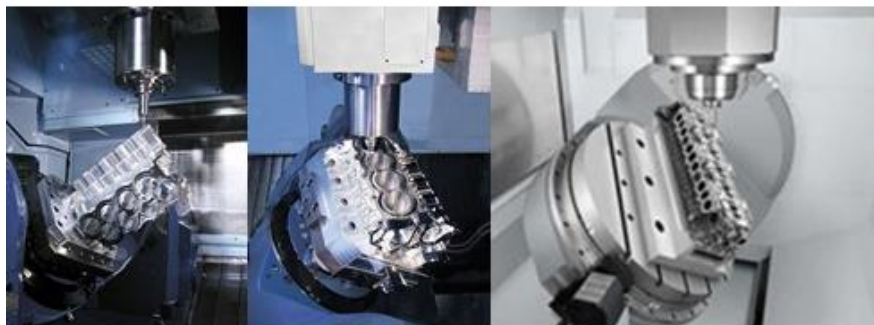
Engine Part Being Machined Using a 5-Axis CNC [16,17]
